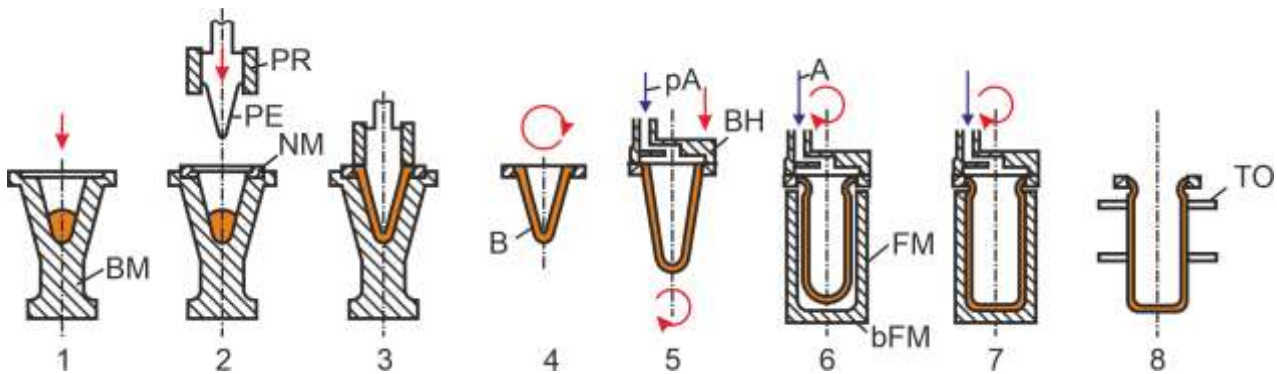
Forming cycle of the H-28 machine: 1 - feeding of glass melt, 2 - preparation of pressing, 3 - pressing, 4 - rotation and heating, 5 - blowing, 6 - closing of the finish mould around the blown post (blank), 7 - blowing of the final shape, 8 - removal of the finished product, BM - blank mould, NM - neck mould, PE - press forming element, PR - pressing ring, B - blown post, BH - blowing head, pA - pulses of low pressure air, A - low pressure air, FM - finish mould, bFM - bottom of the finish mould, TO - take-out pliers
